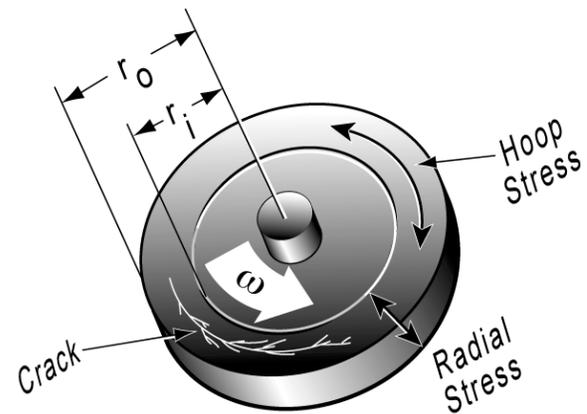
Circumferential Cracks Propagating Around the Wall of a Hollow, Cylindrical Rotor.
